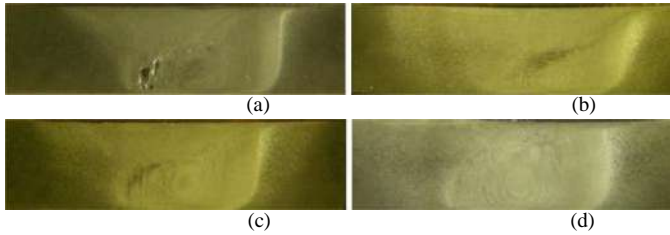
Macroscopic appearances of the joints; (a) 7075-1, (b) 7075-2, (c) 7075-3, (d) 7075-4
